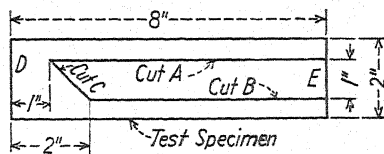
Test Specimen Showing Cuts for Coating Adhesion Test.
